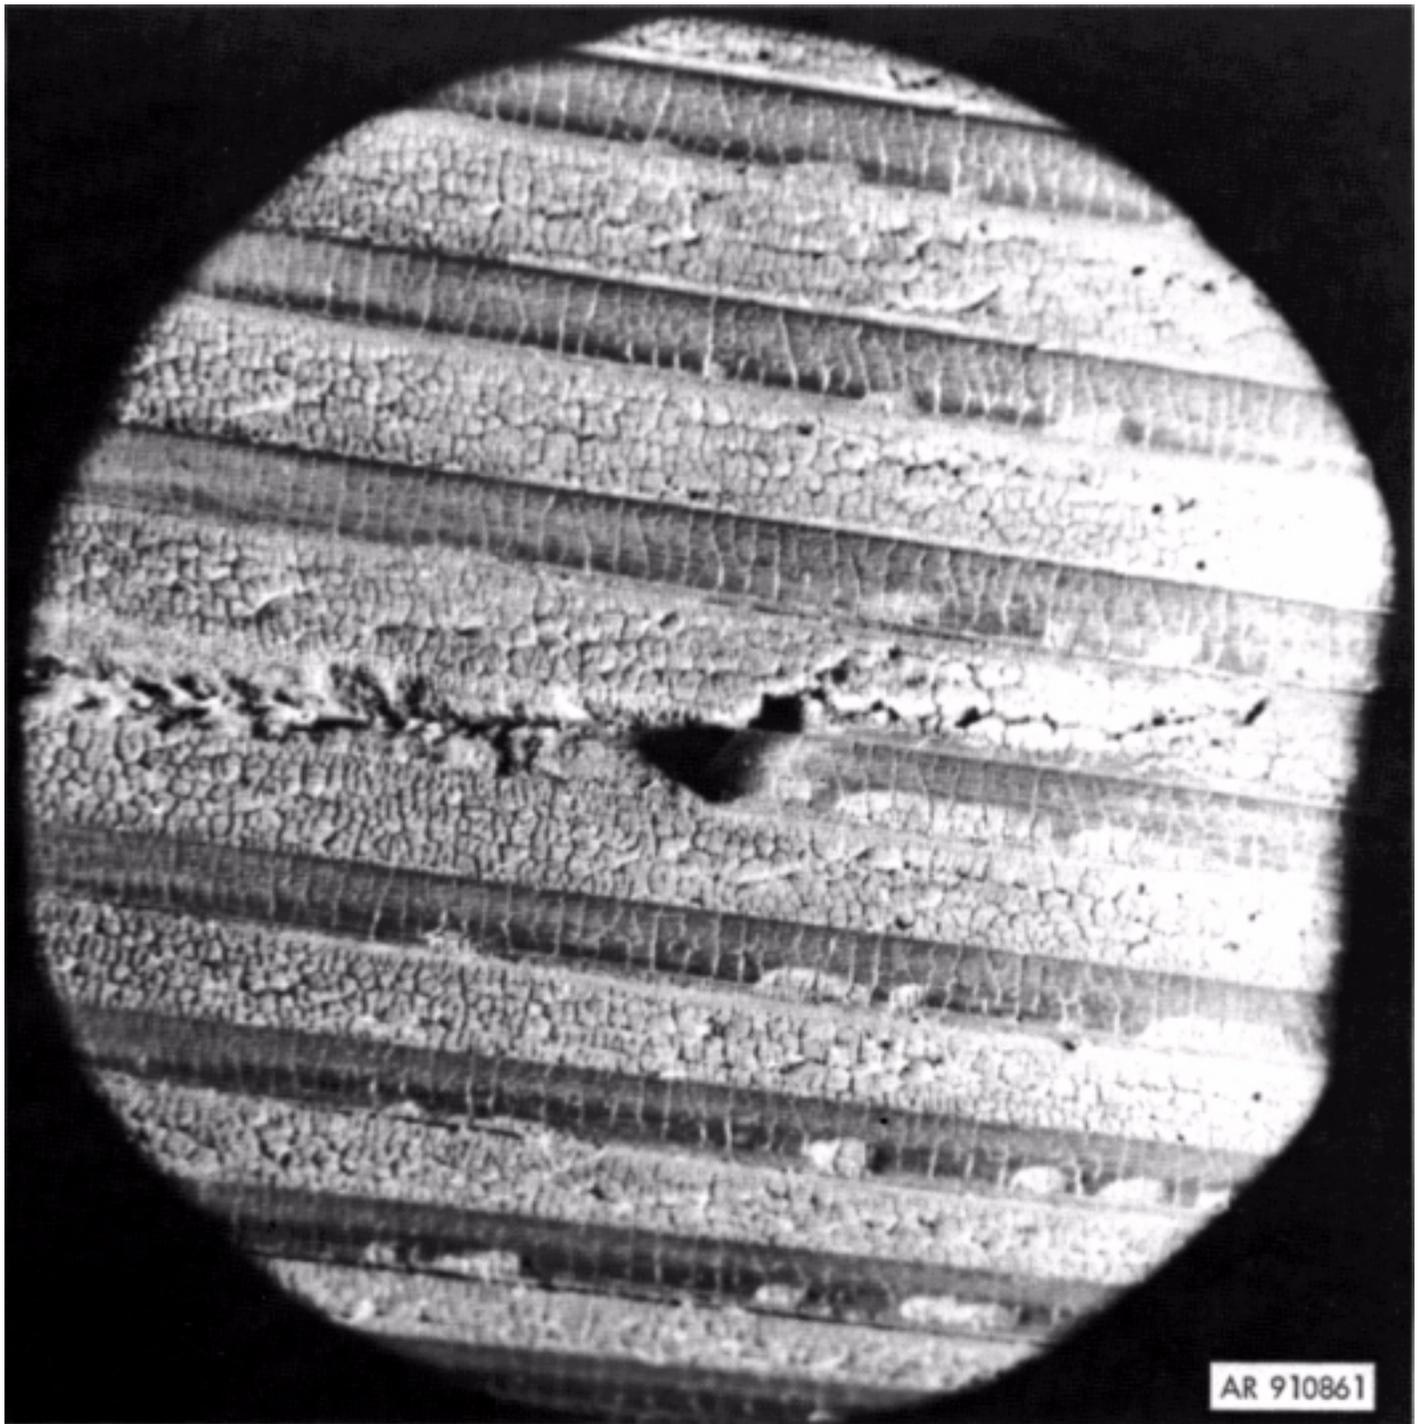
View of crack due to fatigue after 15,000 rounds extending from forward of origin of rifling rearward into chamber. (2 of 2)
